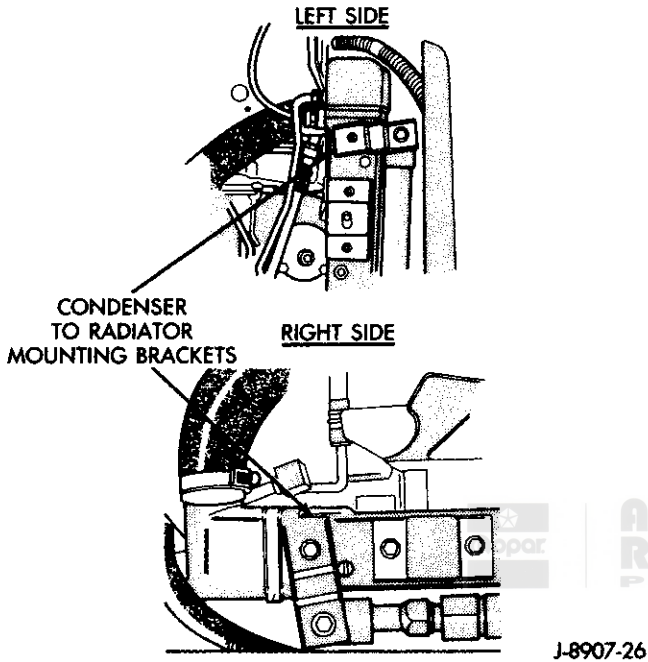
Condenser to Radiator Mounting Brackets—4.0L
